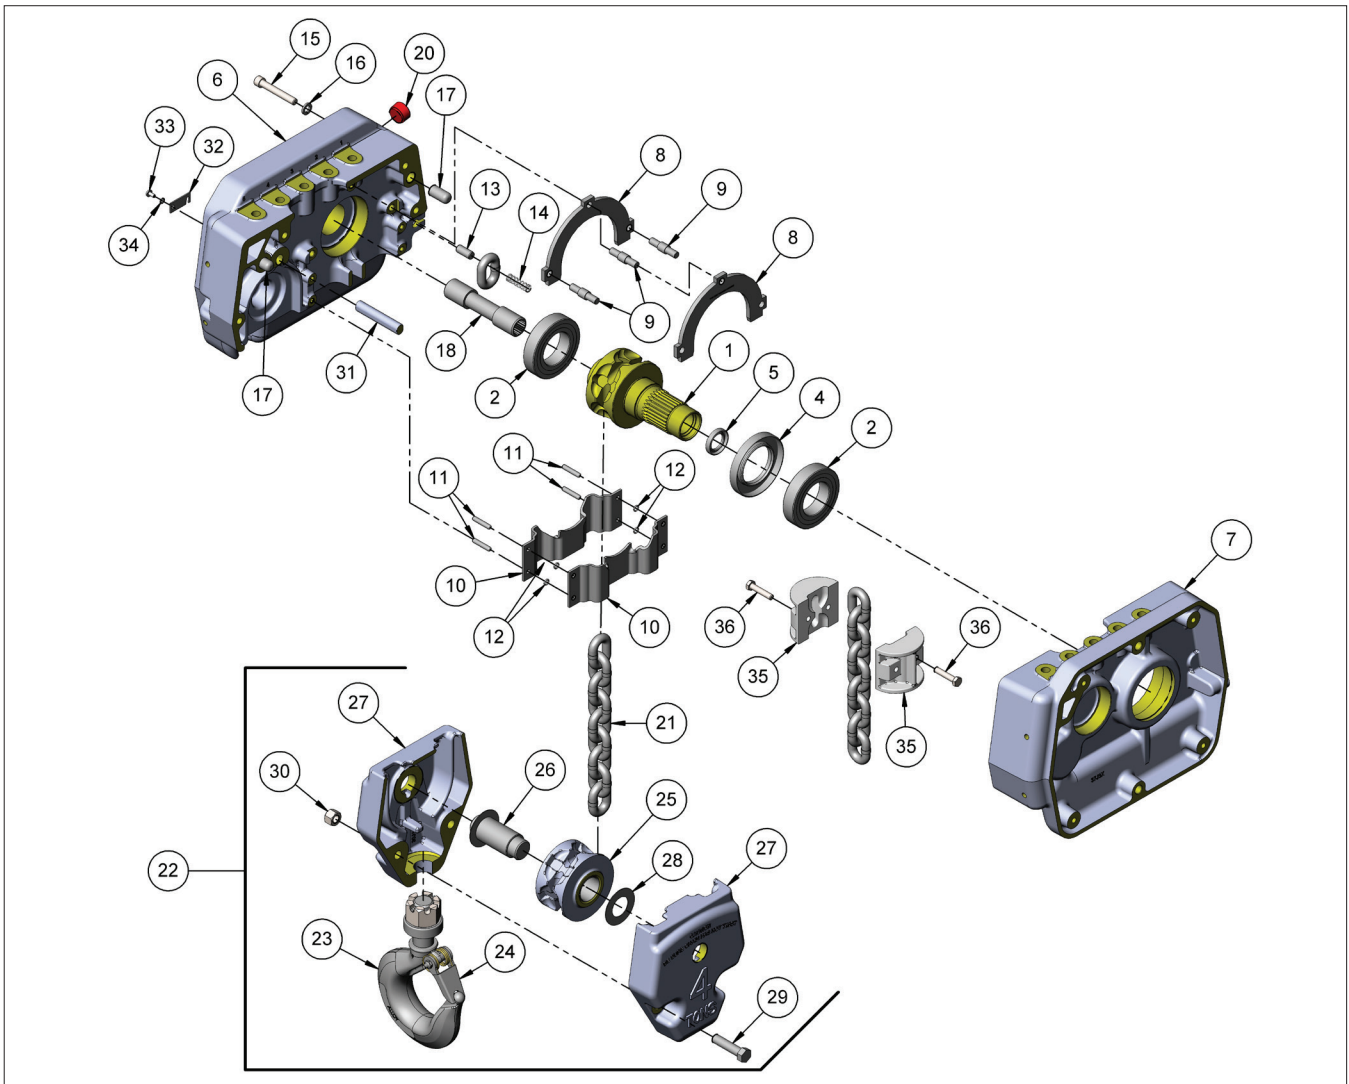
B. CHAINING PARTS (DOUBLE CHAIN)
